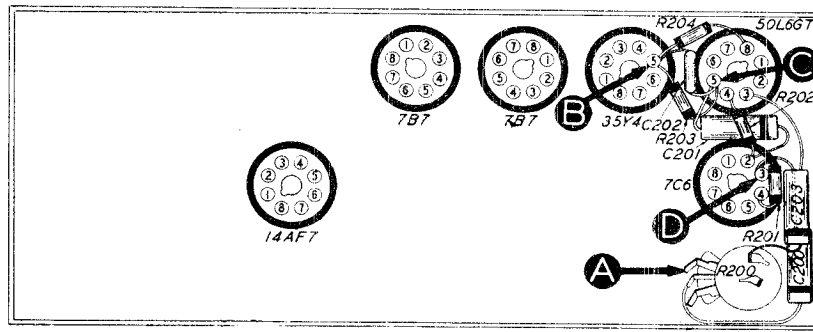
BOTTOM VIEW, SHOWING SECTION 2 TEST POINTS
